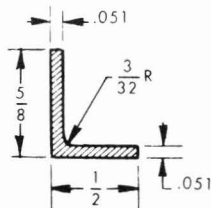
(Sheet 6 of 21) — Extrusion Charts
